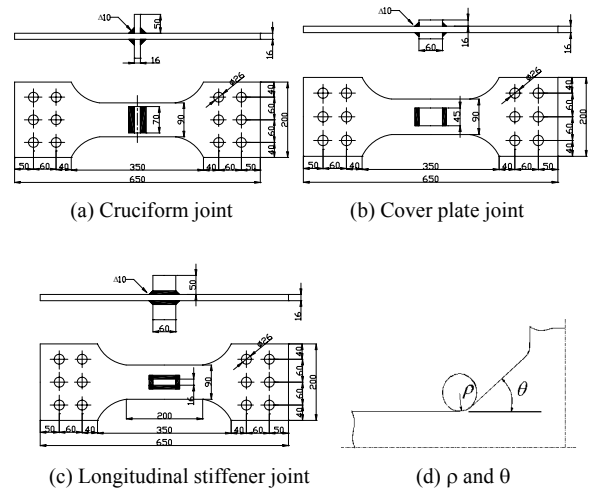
Configuration of welded joints and geometrical parameters (unit : mm).
